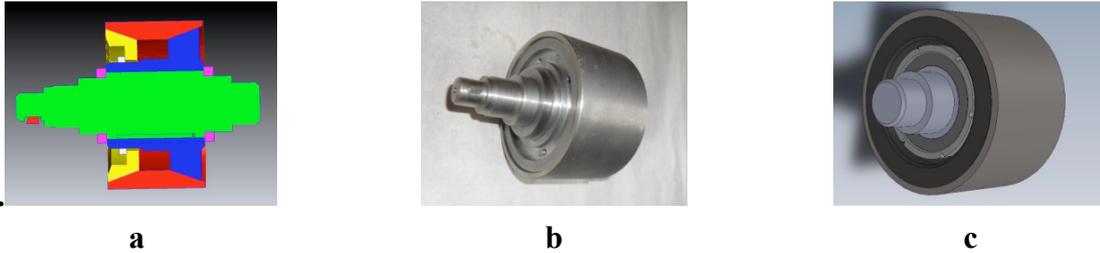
Variant F₁₄ – Conical cylinder inside, assembled by long and tapered nut pieces:
